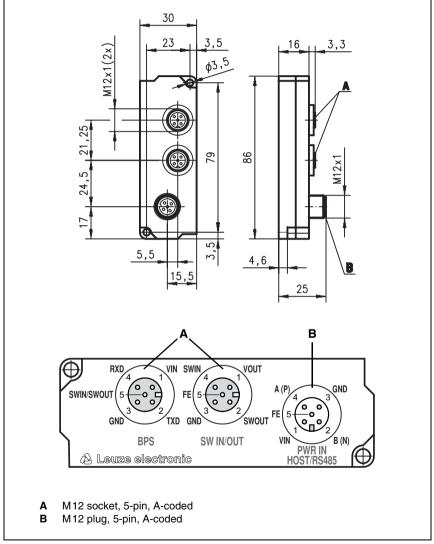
Dimensioned drawing and position/designation of the MA 8-01 connectors
